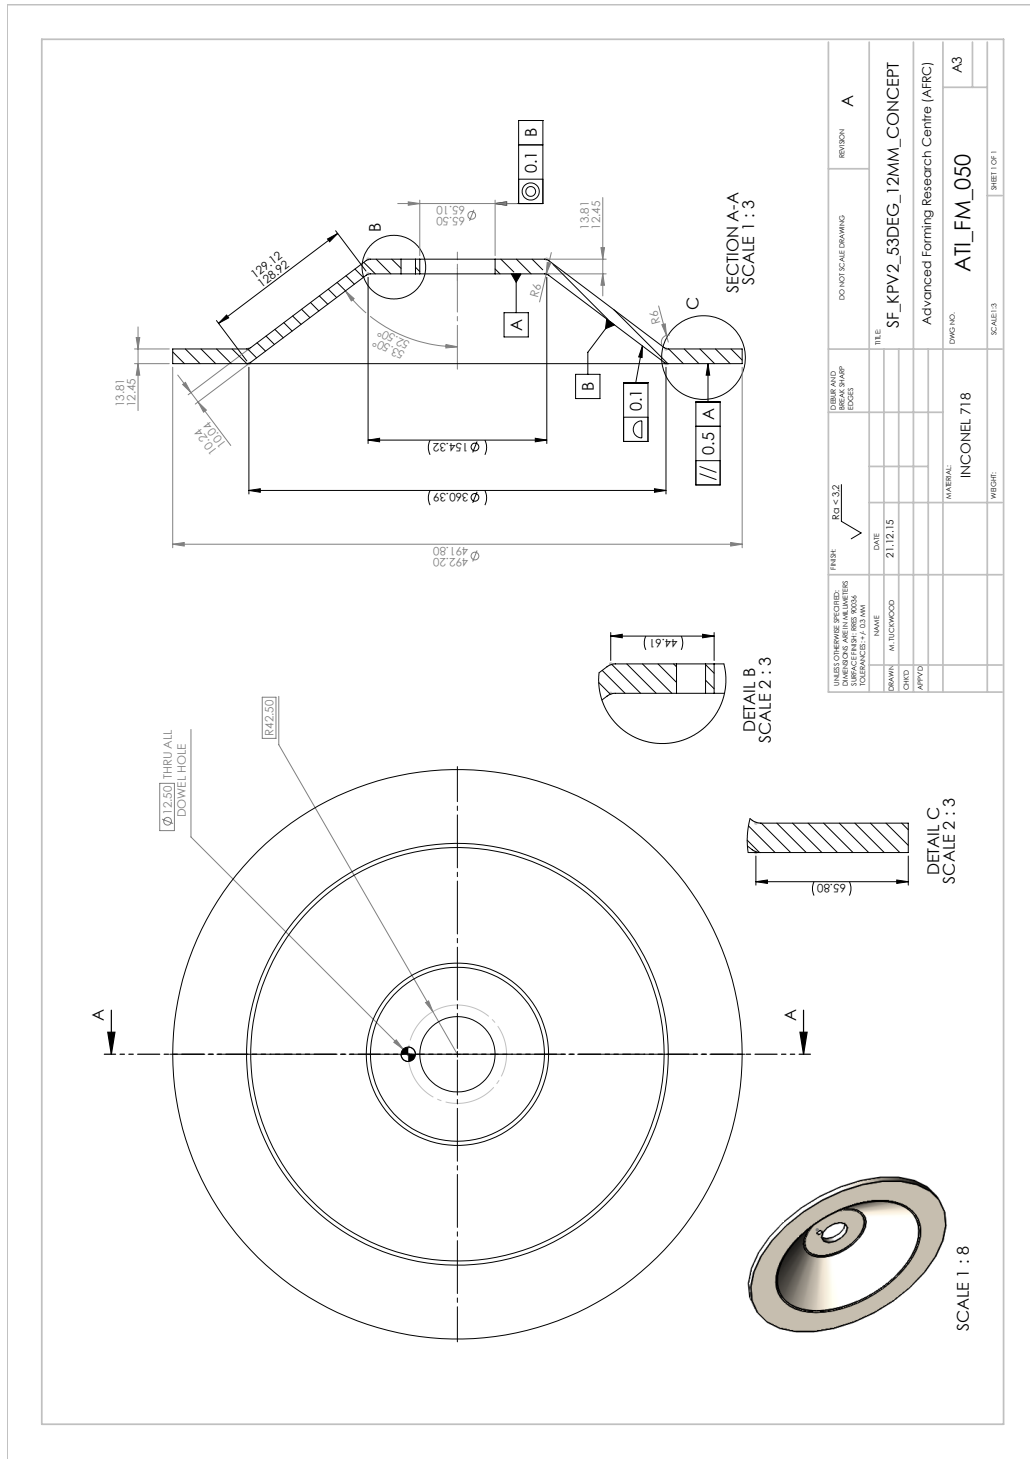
Drawing: Shear formed part – 53°, 12 mm thick, ATI-SF – ATI FM 050, “SF\_KPV2\_53DEG\_12mm\_CONCEPT”.
